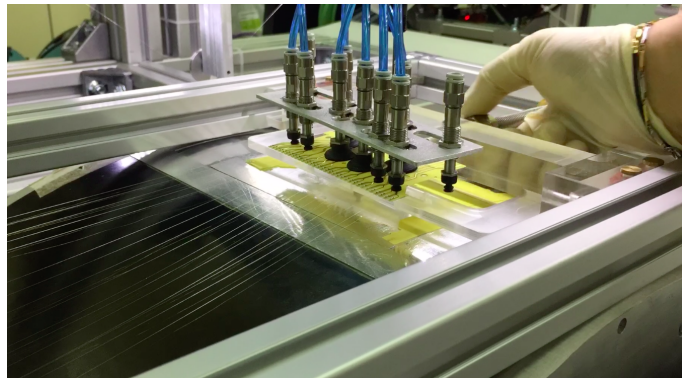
DS wire PCB is lifted off from the cylinder.
